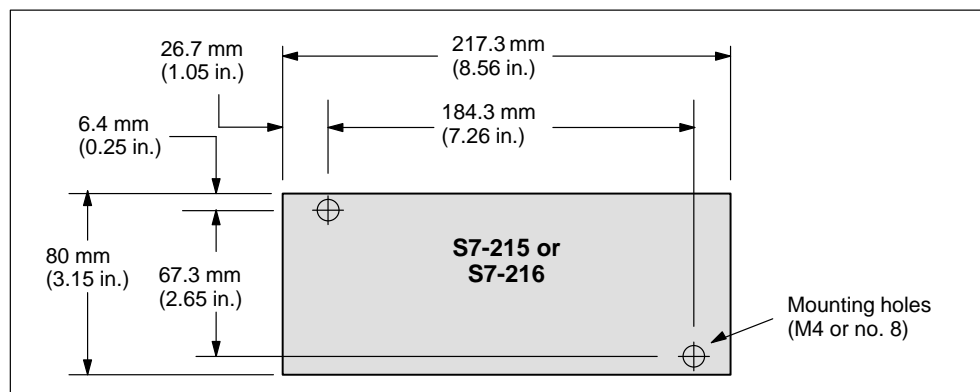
Mounting Dimensions for an S7-215 or S7-216 CPU Module
